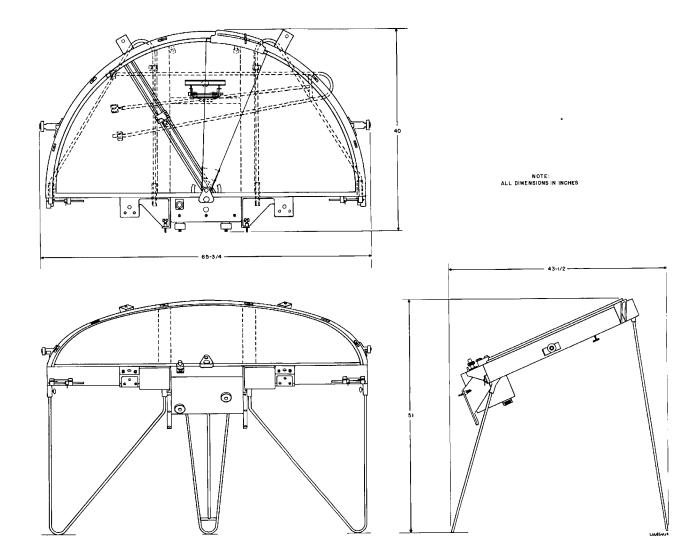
Tactical Display Plotting Board PT-441/TPS-25, Dimensional Drawing.
